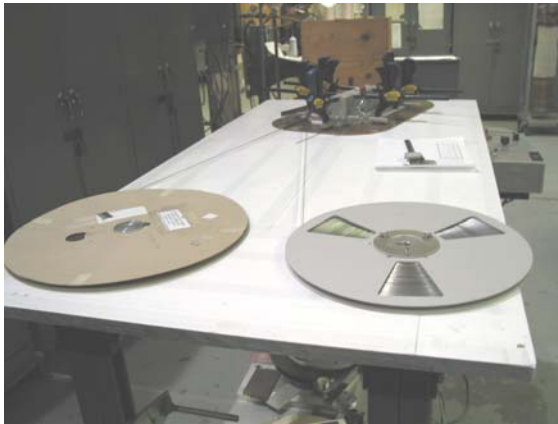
A coil being made by co-winding HTS tape (on right) and stainless steel insulating tape (left). This is wound using a first generation winding machine that could be quickly set-up.
